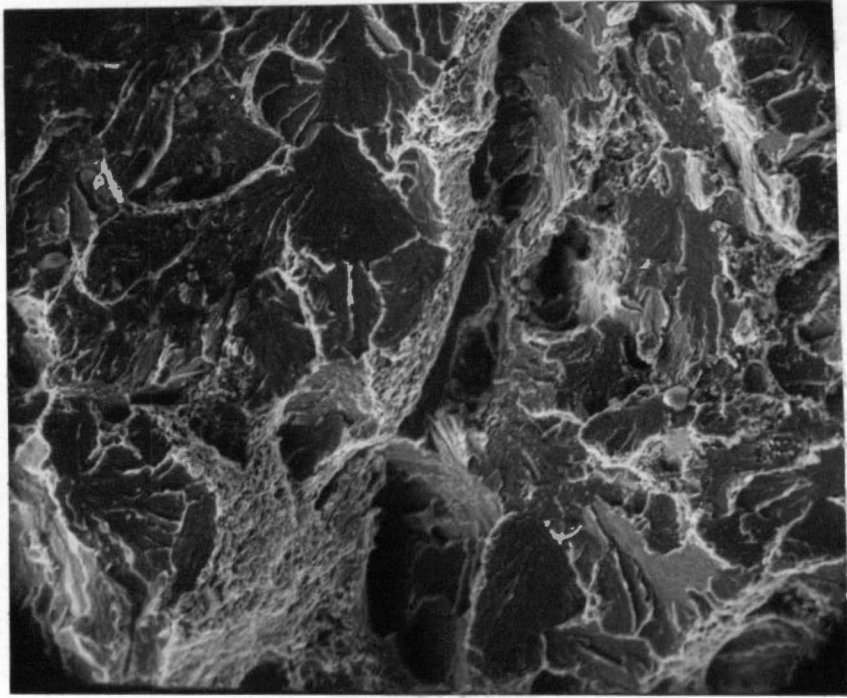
SEM Fractograph of the 0.232 Inch Specimen. Area Shows a Macroscopically Flat Fracture Surface Which Contains Dimples.
